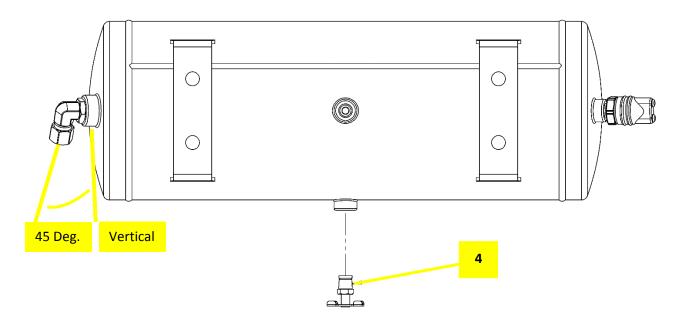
Tank Air Fittings Exploded (Back View from Behind Vehicle)
